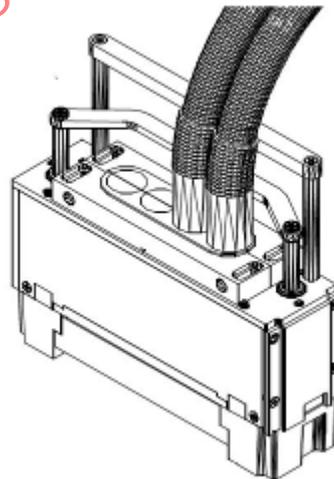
Segmented, four-slot fixture frame without connector shroud and with 101.6 mm (4.0 in) cable strain relief enclosure
